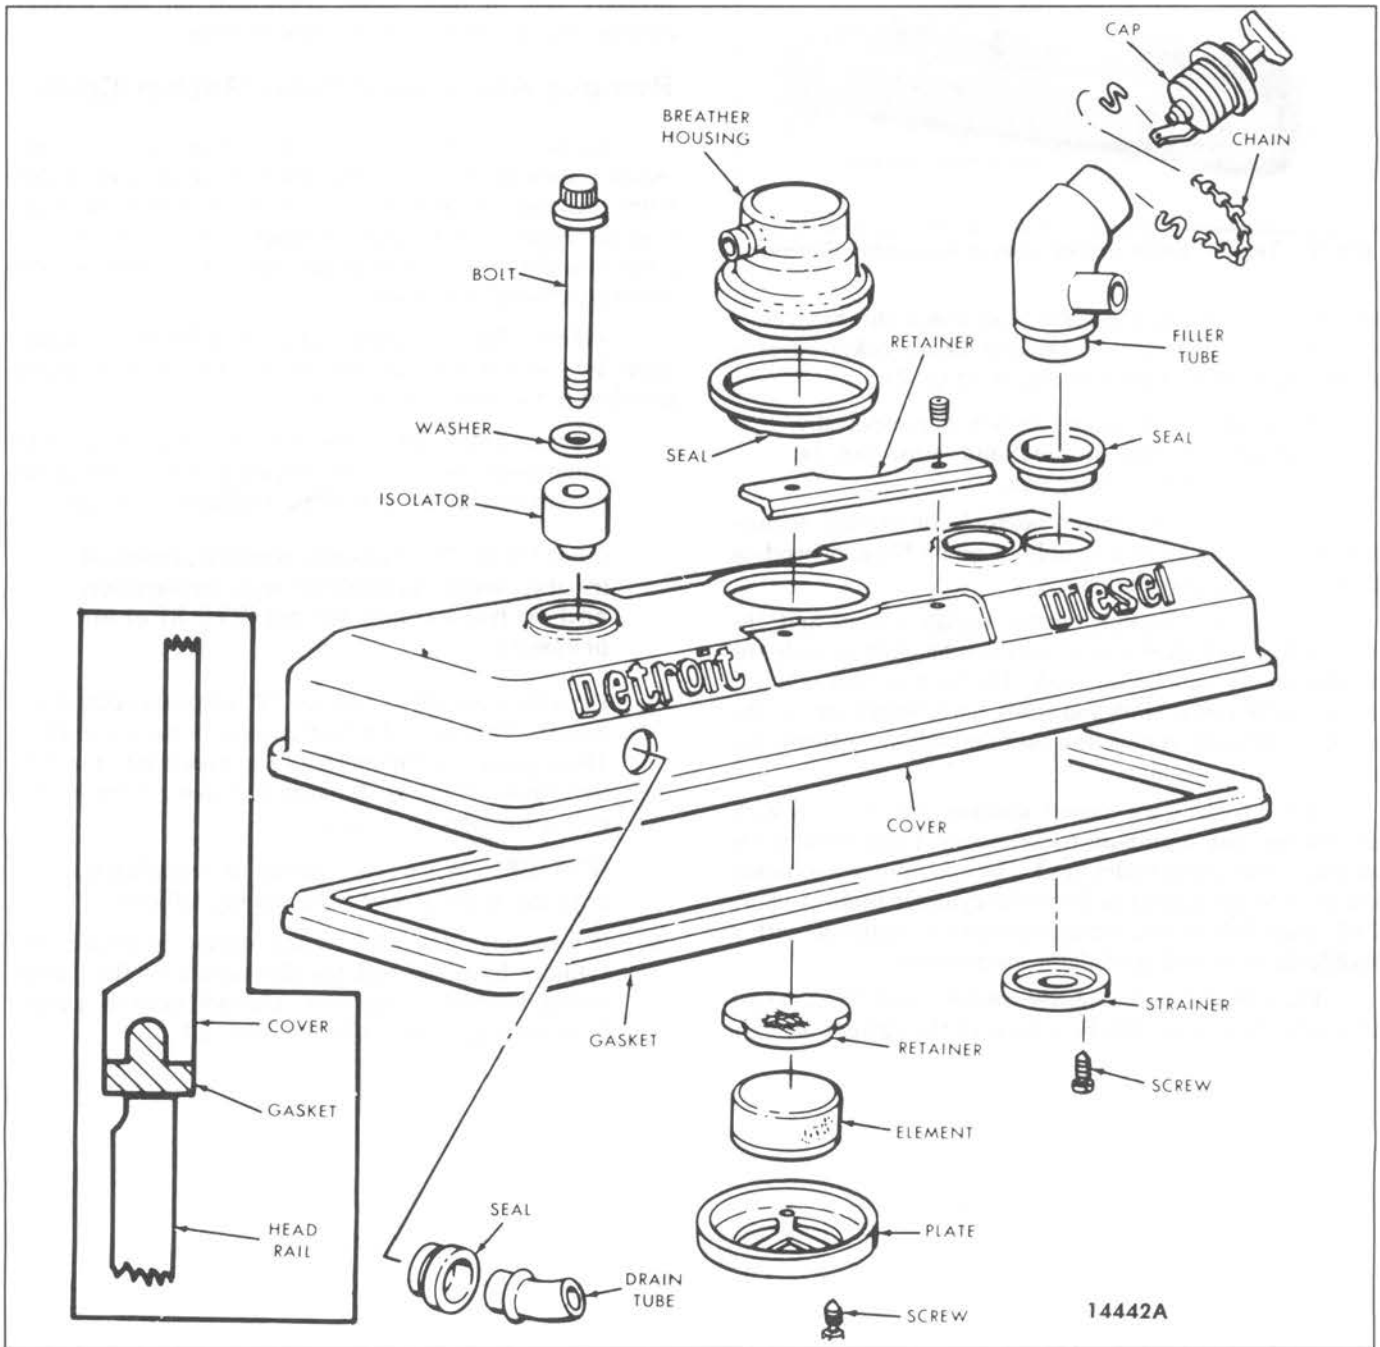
Typical Valve Rocker Cover Assembly (Current)
